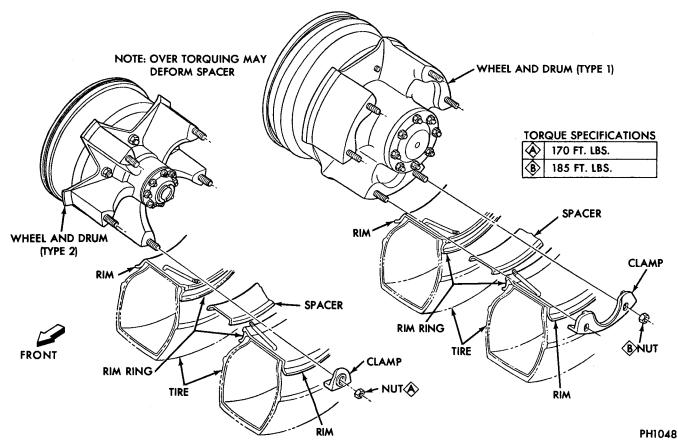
Dual Cast Wheel Mounting-D600, S600, S700, D800
